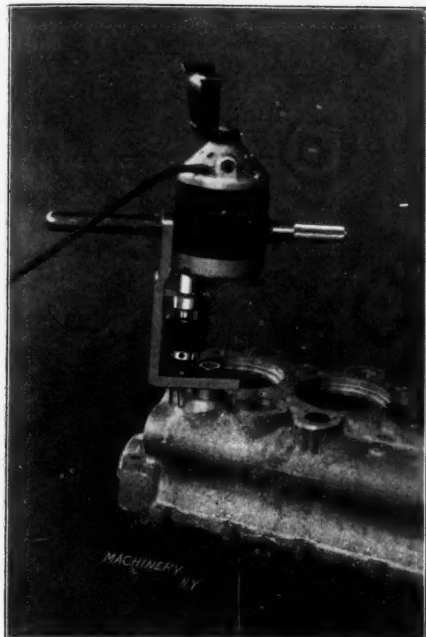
Air Drill with Taper Mill used for Trimming the Crank-case Bosses
